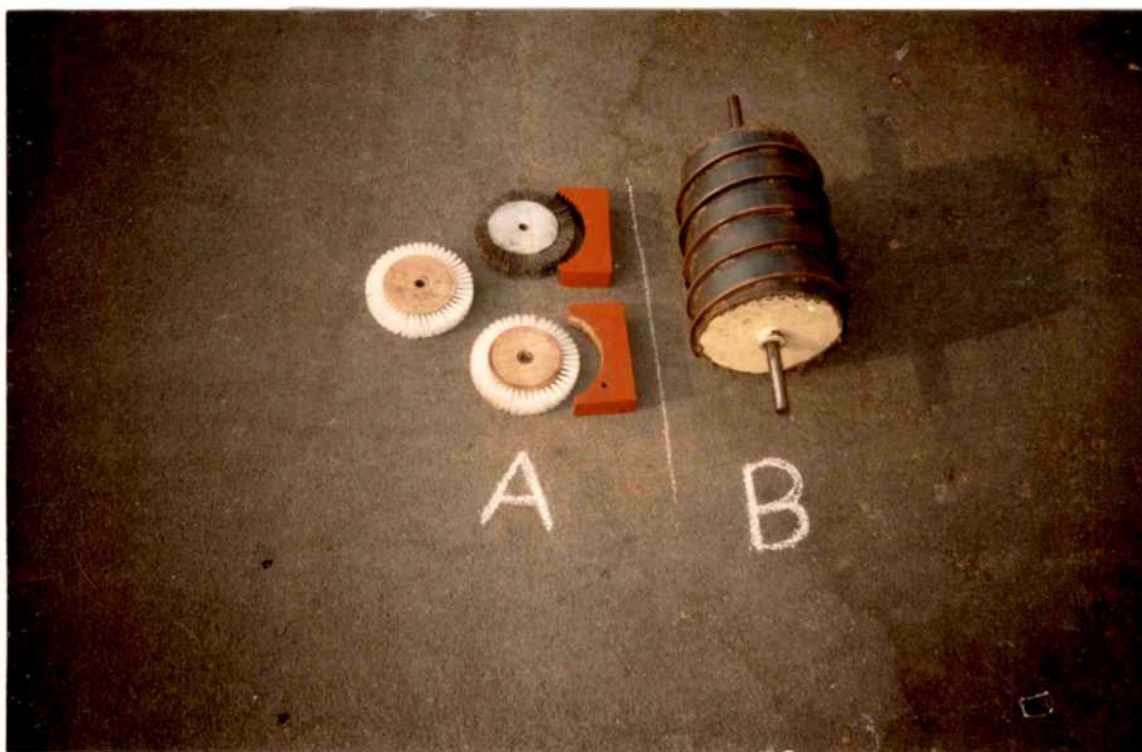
A view of the screw auger (B) and brush (A) assembly
